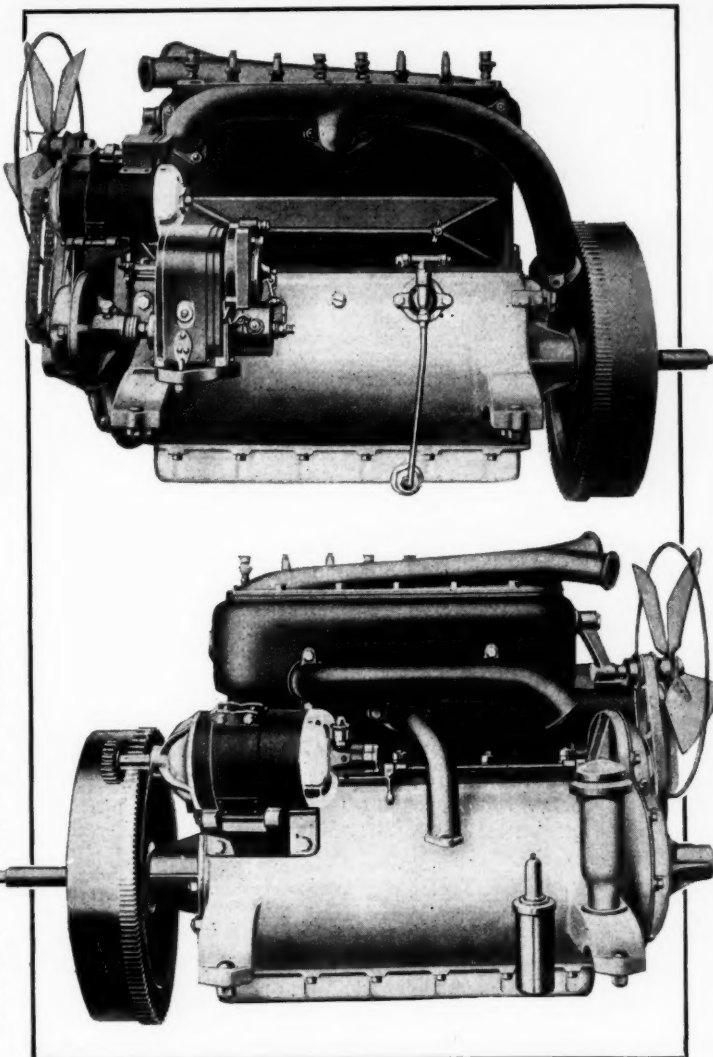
Upper—Valve side of motor used in the underslung Regal, showing Rushmore generator and Michigan magneto mounted well to the front, thereby leaving valve springs accessible
